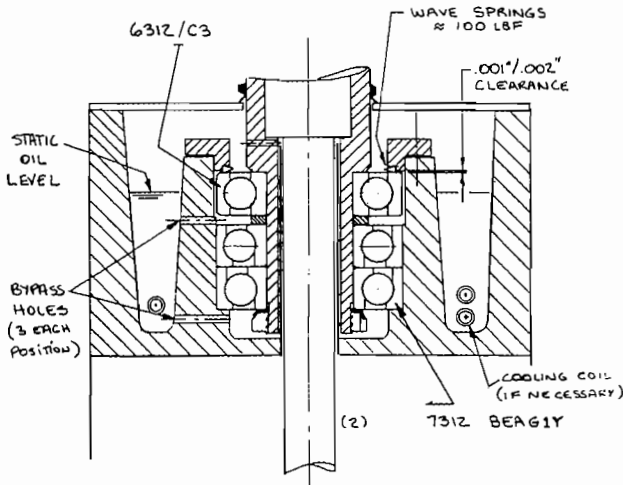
Vertical Pump Thrust Bearing Arrangement.
